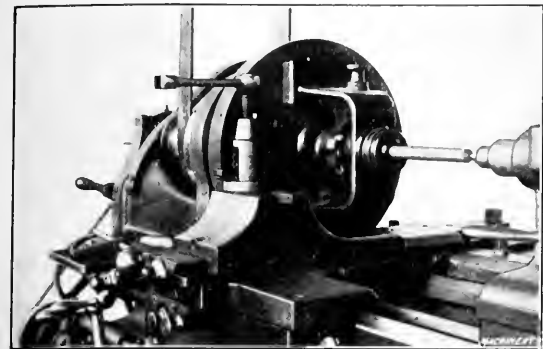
Application of Bemis Auxiliary Head to Lathe Work
